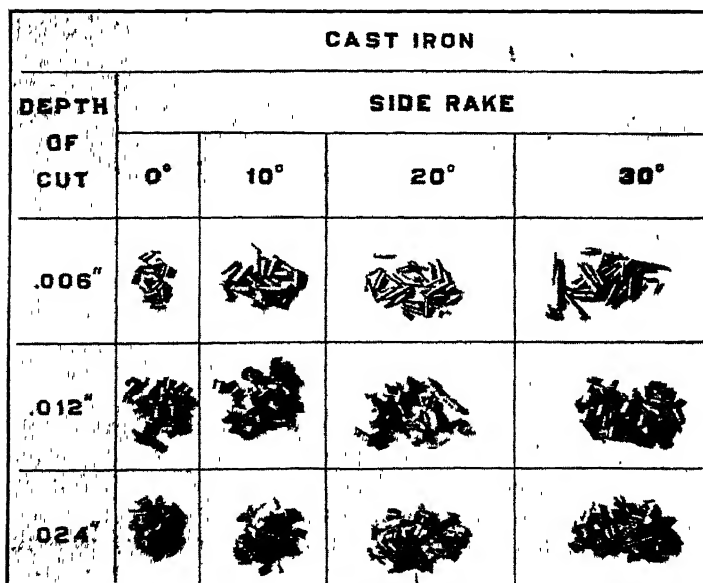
CAST-IRON CHIPS 0.5 IN. WIDE REMOVED BY TOOLS HAVING 30-DEG. FRONT-RAKE AND VARIOUS SIDE-RAKE ANGLES
